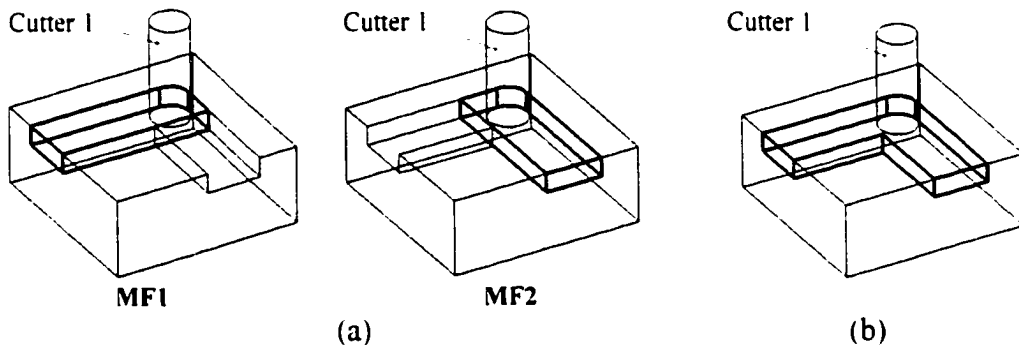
An example of desirable merging of features: (a) two open pockets in an SFM with the same cutter size; (b) merged feature.
